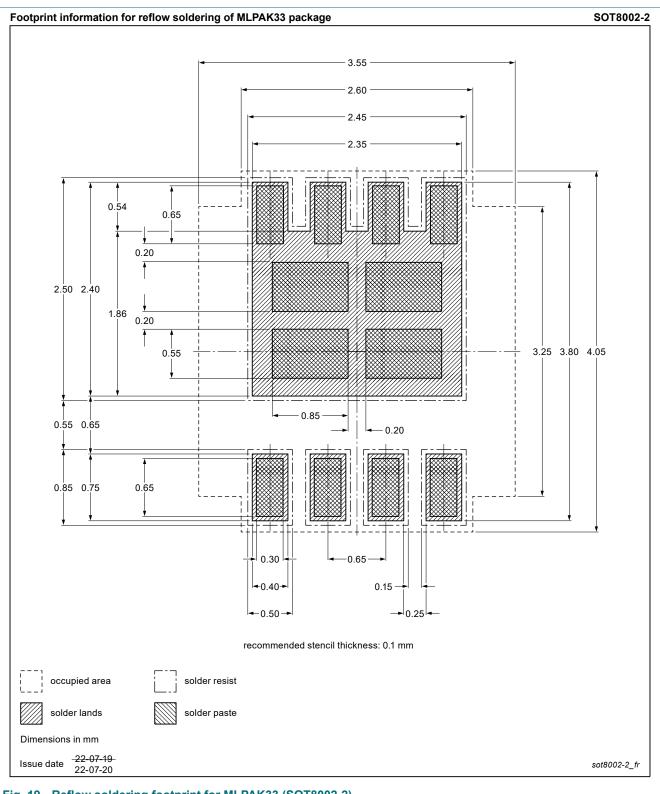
Reflow soldering footprint for MLPAK33 (SOT8002-2)
